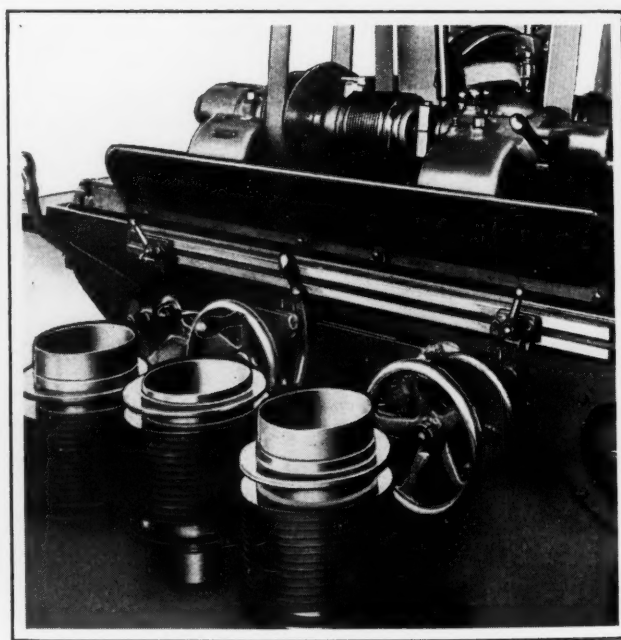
Grinding the Seats and Adjacent Faces on a Cylinder Barrel which is Mounted on a Special Mandrel
